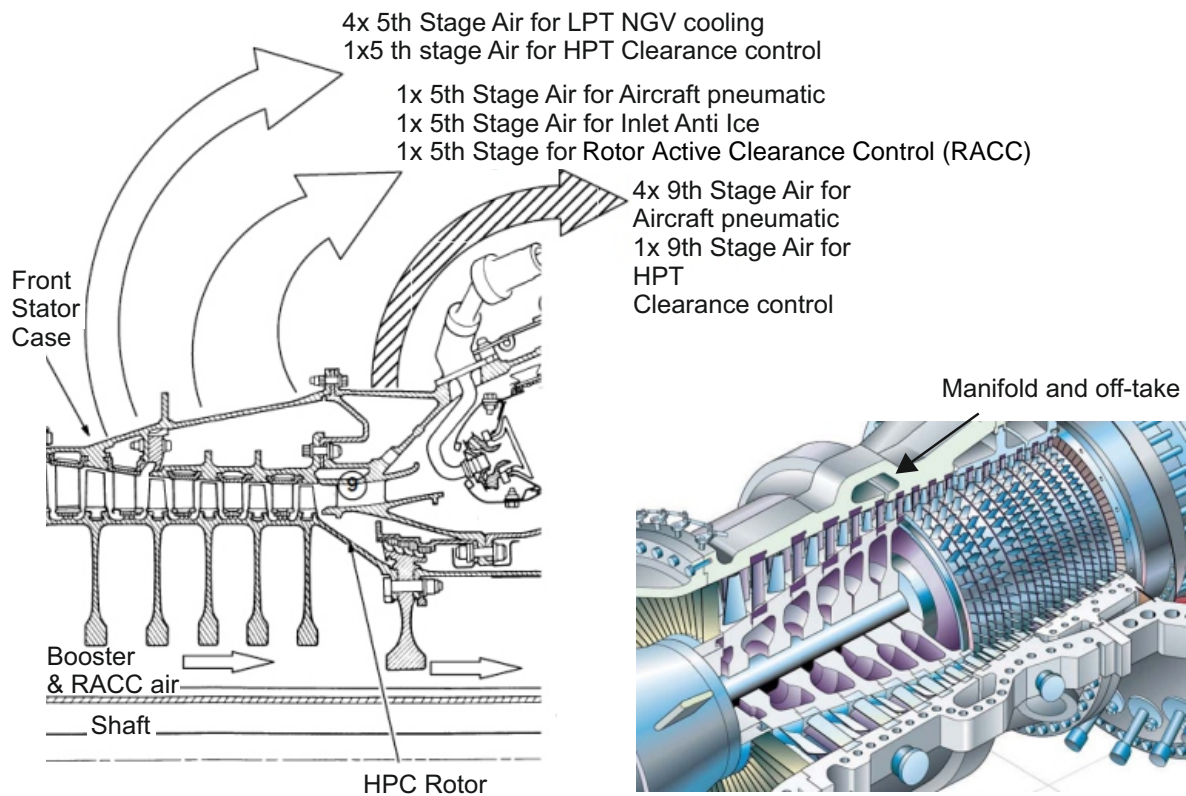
Left: CFM56 High-pressure compressor with bleed air off-takes. Right: Manifold and off-take of an SIE 4000F (from Scholz 2018)
